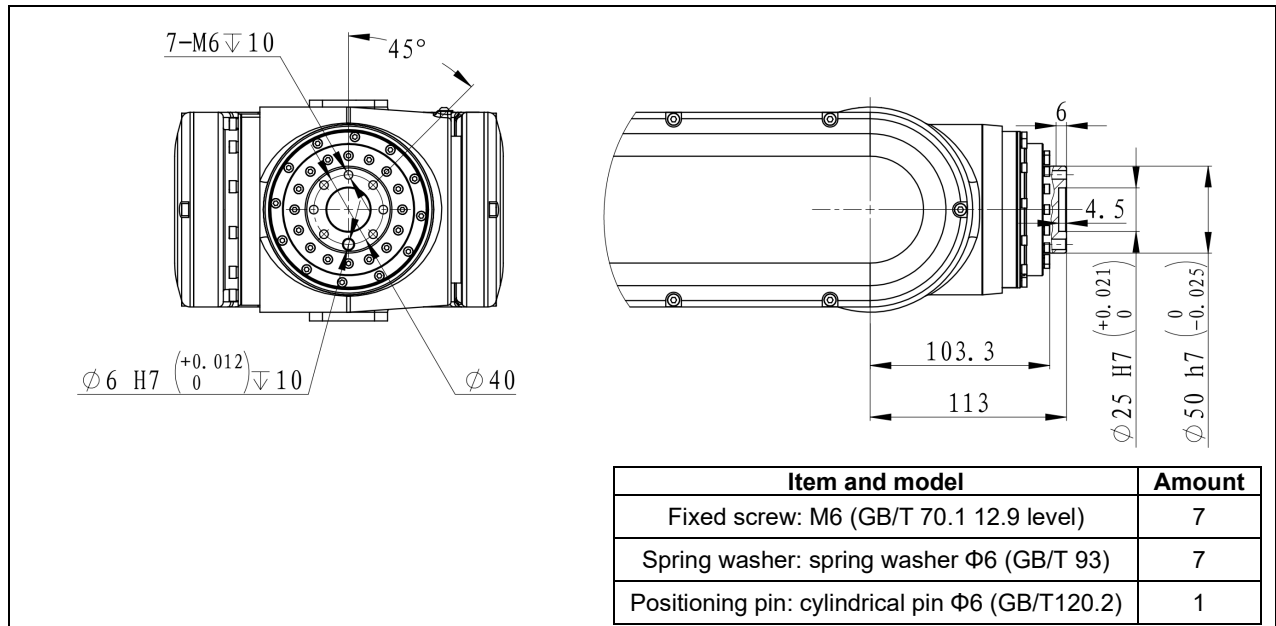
End flange mounting interface (ER20B/10-2010-HI, ER12B-1510-LI, ER12B-1510, ER20B-1760)
